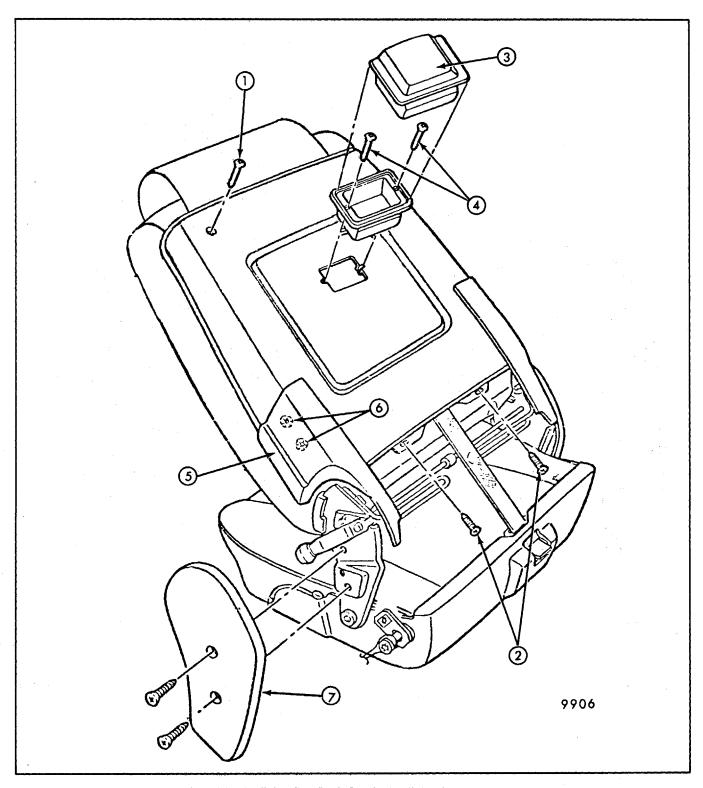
Reclining Seat Back Panel - Reclining Seat Back - A Styles
